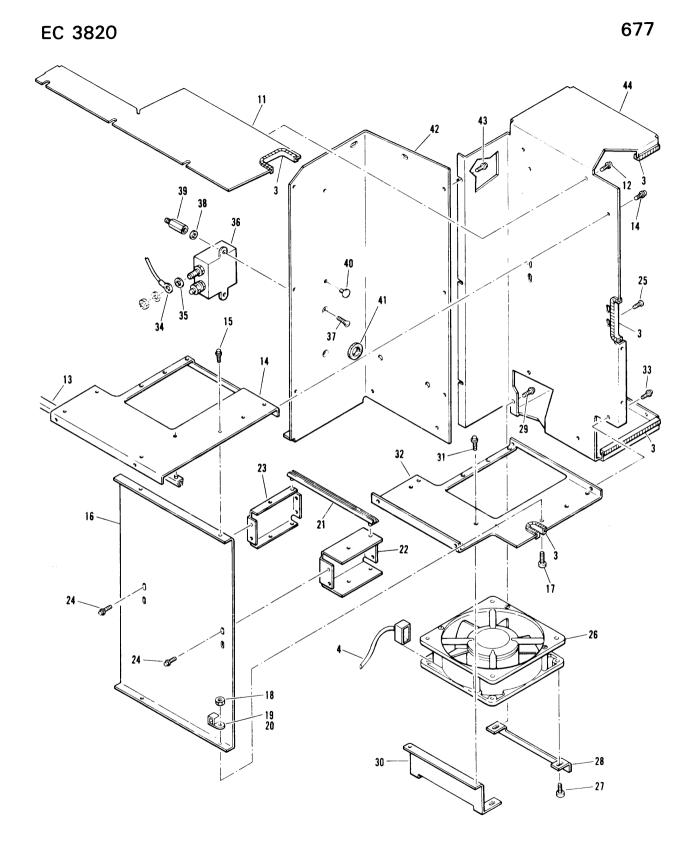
HOUSING ASM (SHEET 2 OF 2)
